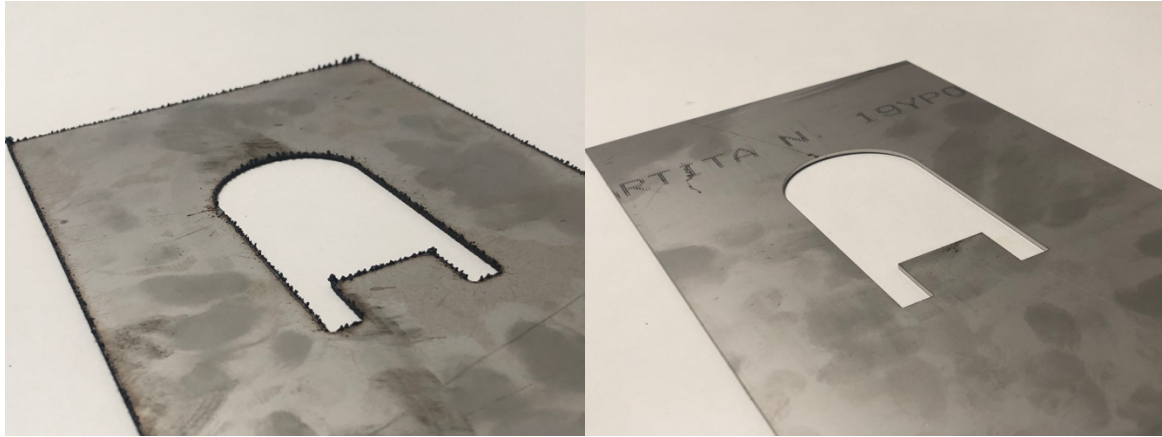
Semple cut on plasma (left) and laser (right) cutting machine (Source: Own picture)
